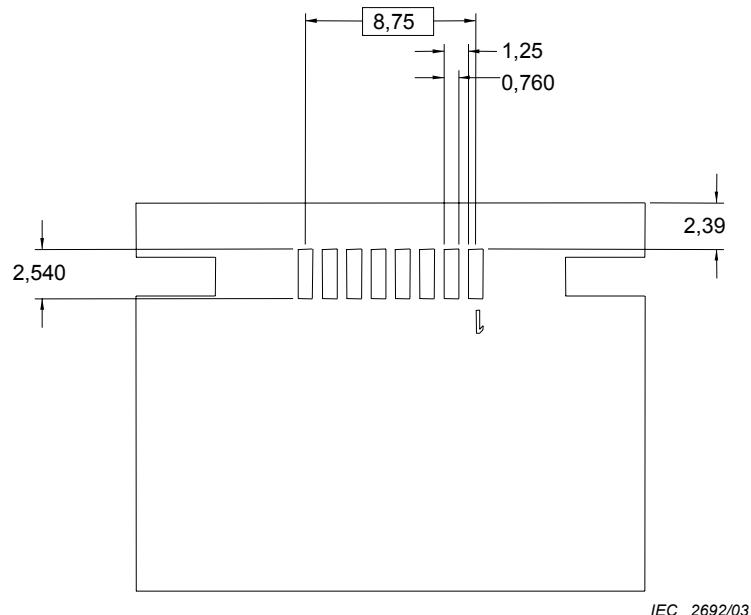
Fixed board connector (XB) straddle mount (version 1) (TA) printed board mounting pattern
